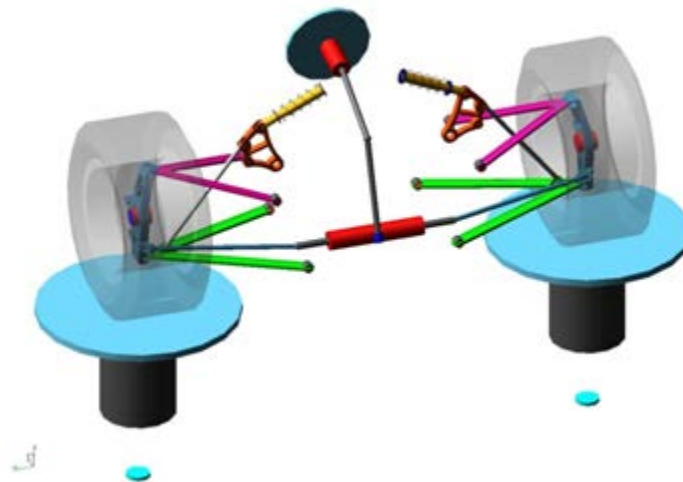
MBD Model of TU FSAE Front Suspension Assembly
